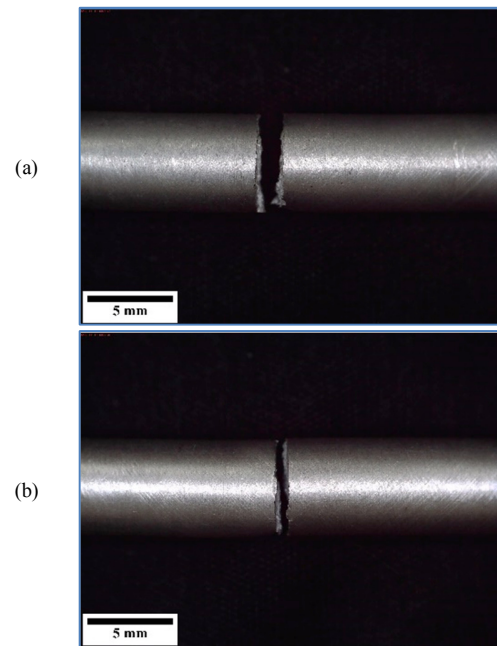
Fracture surfaces for t_f : (a) 9s, (b) 10s
